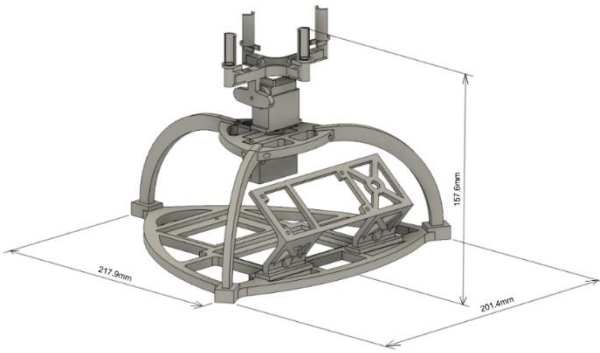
CAD model of the 3D-printed mechanical structure of the dual-axis solar tracker with overall dimensions (mm)
